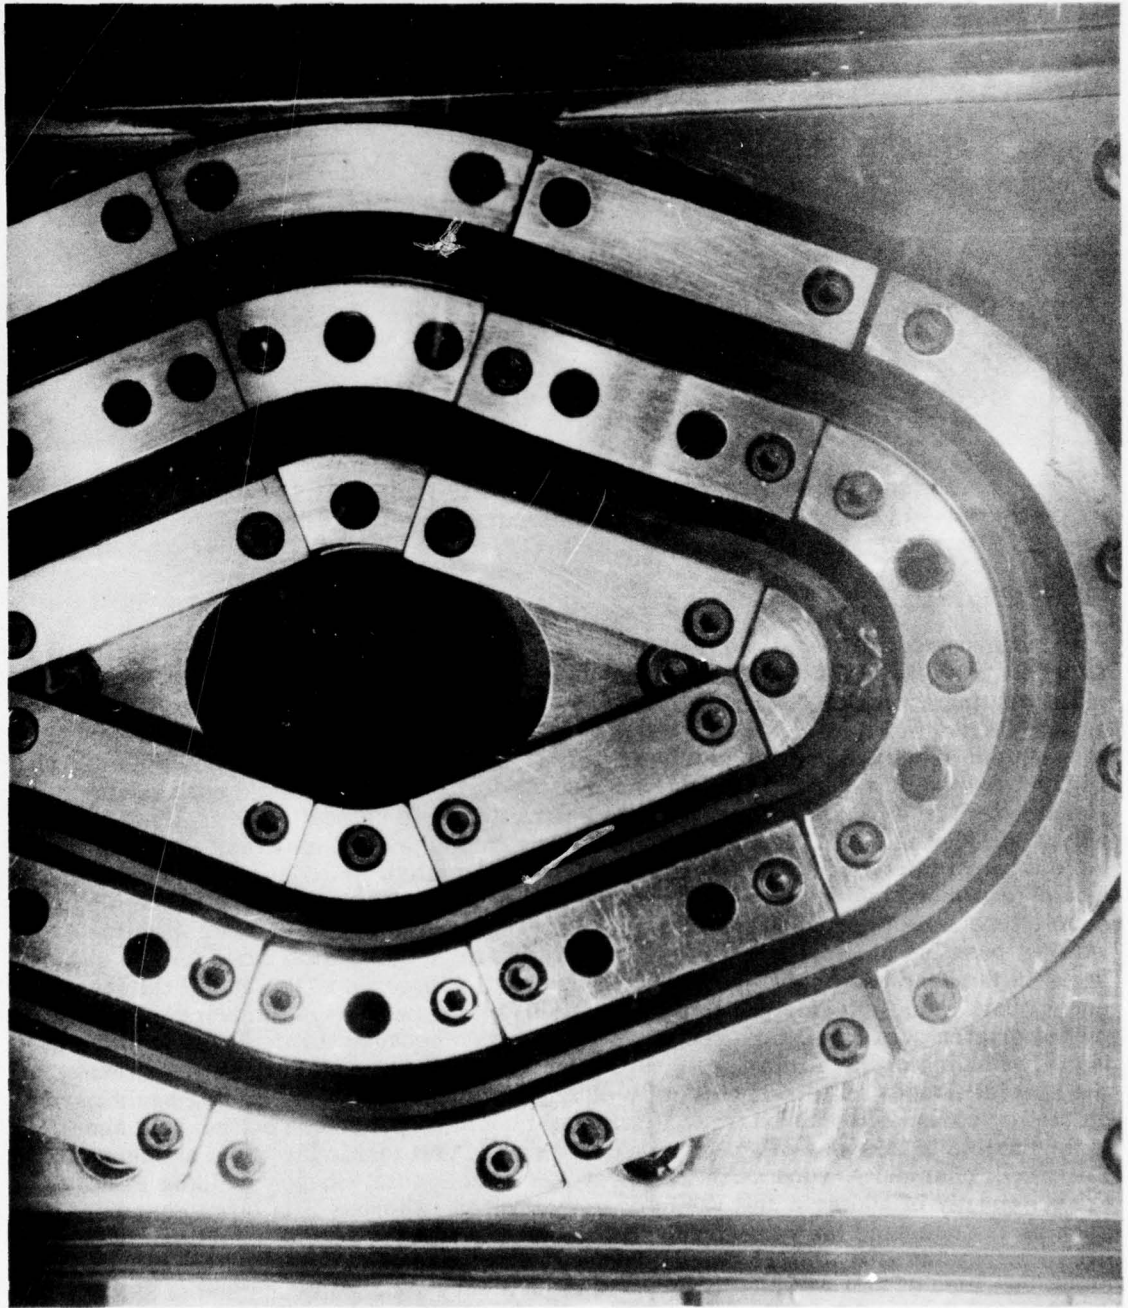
Sliding Seal Set No. 7 - Wear Caused by Short Test Panel
